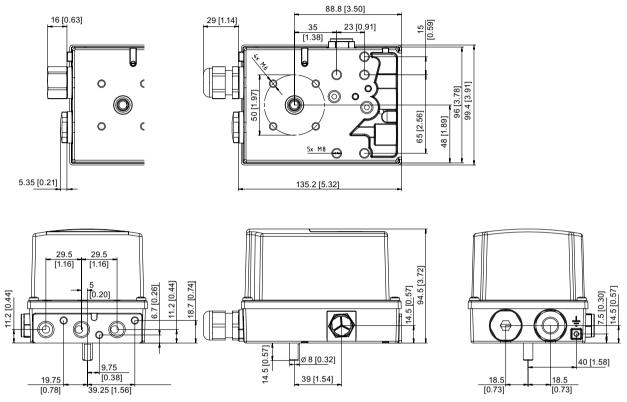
Dimension drawing, dimensions in mm (inch)
